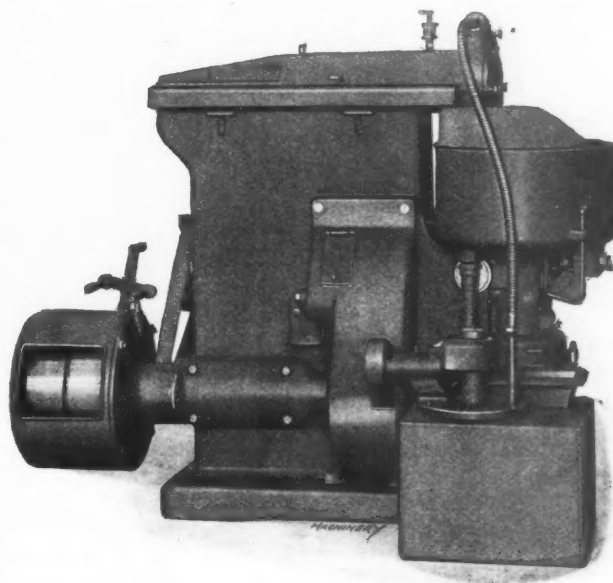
Opposite Side of Heald Rotary Surface Grinder shown in Fig. 1
